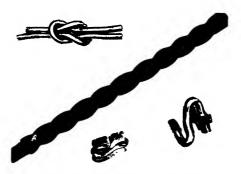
Specimens cut entirely from deposited weld metal showing the typic il ductility of the Smith weld
